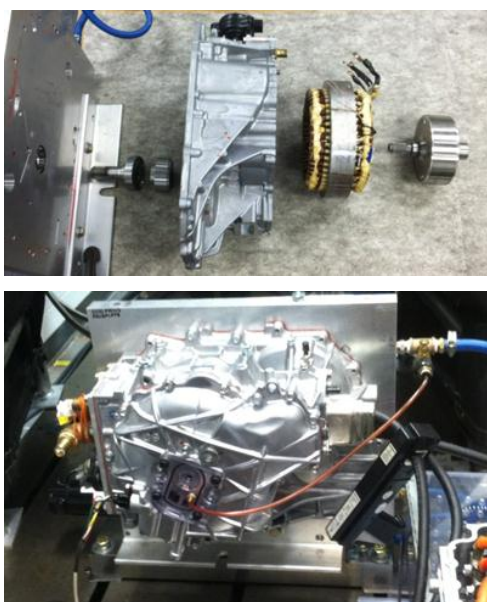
Top: Exploded view of prototype of 6.5% silicon steel stator in spin test assembly. Bottom: Fully assembled spin test apparatus with rare earth magnet rotor and water/ethylene glycol cooling.
